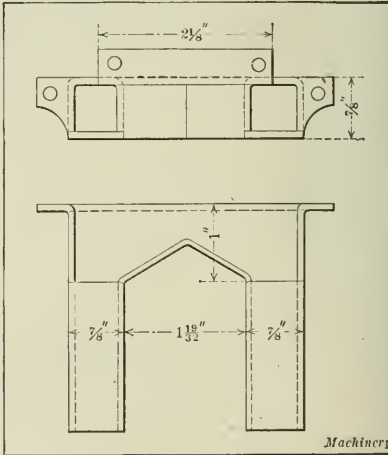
Chute used on Socket Die for discharging Finished Parts
